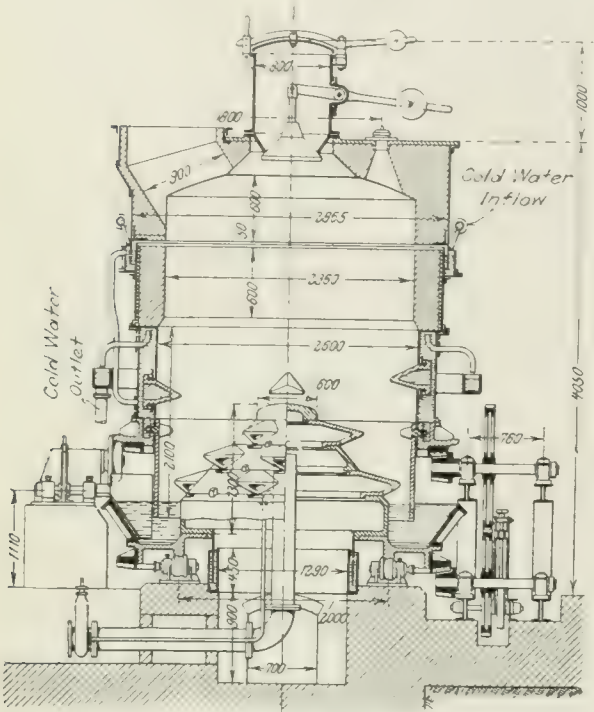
Section of the Küppers Gas Producer. Dimensions Are in Millimeters.
